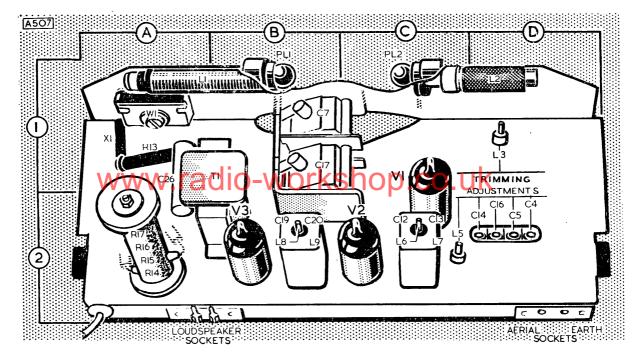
Plan view of receiver chassis, showing locations of valves and components.
